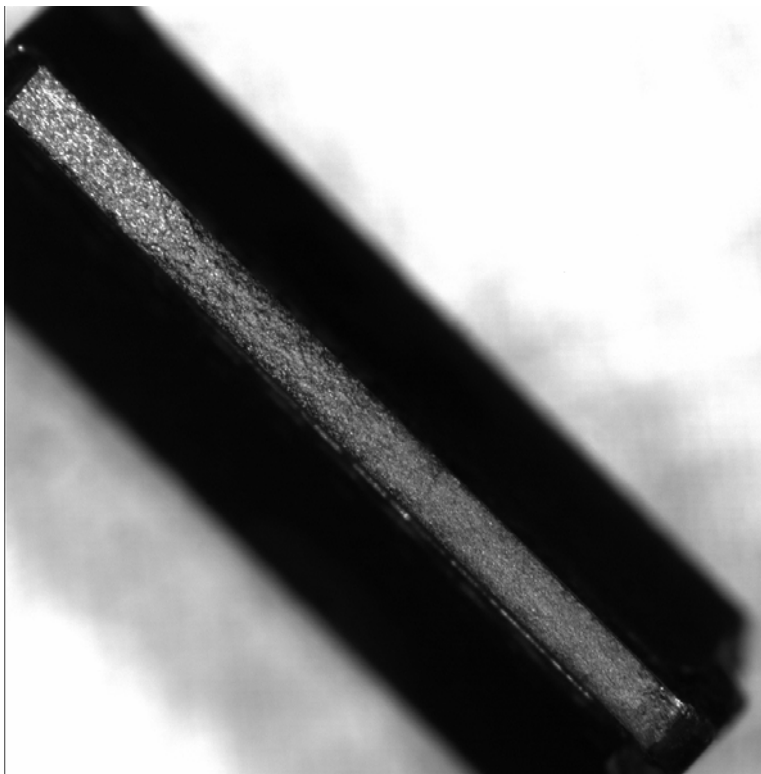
Fracture Surface of Specimen 5893.
